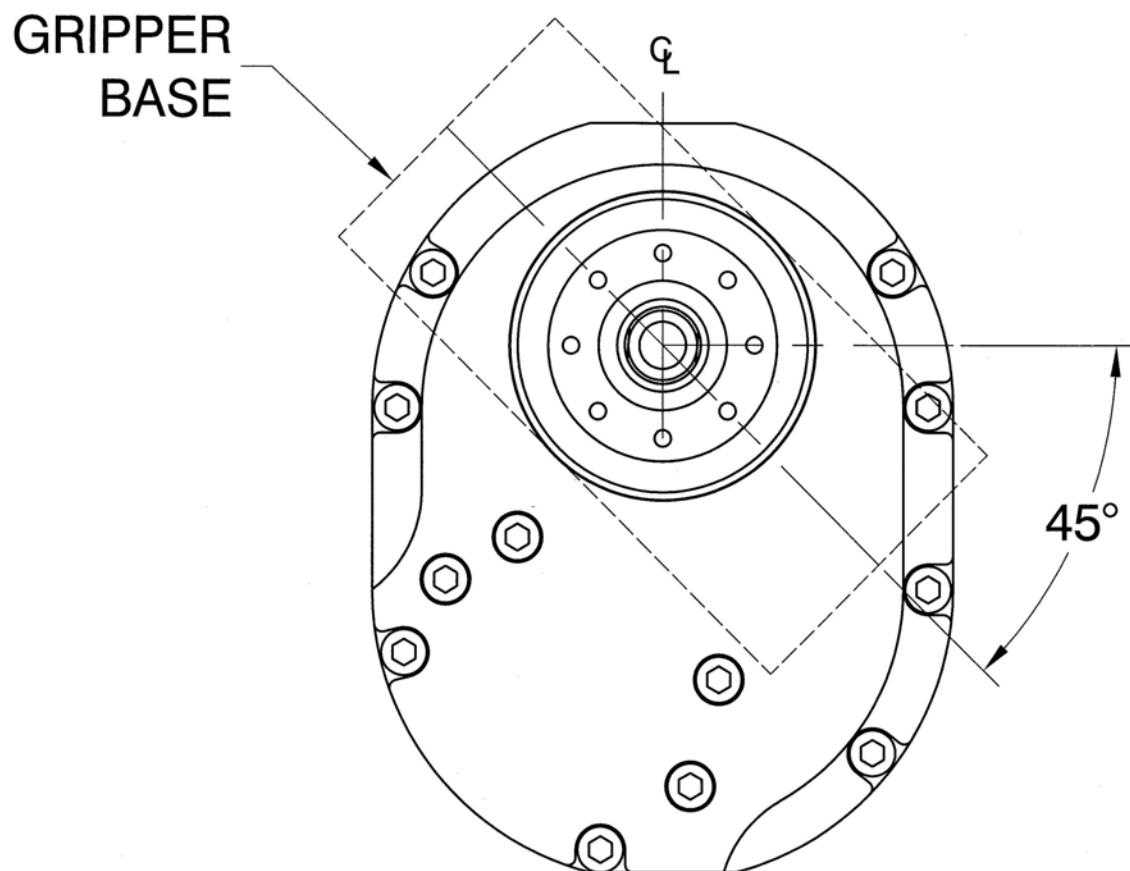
Position of wrist roll actuator shaft when centering potentiometer electrical travel
